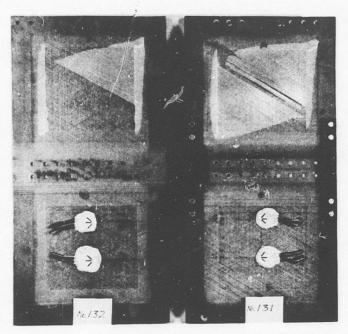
Specimens 131 and 132 - Bag Side Showing Failure Areas.
